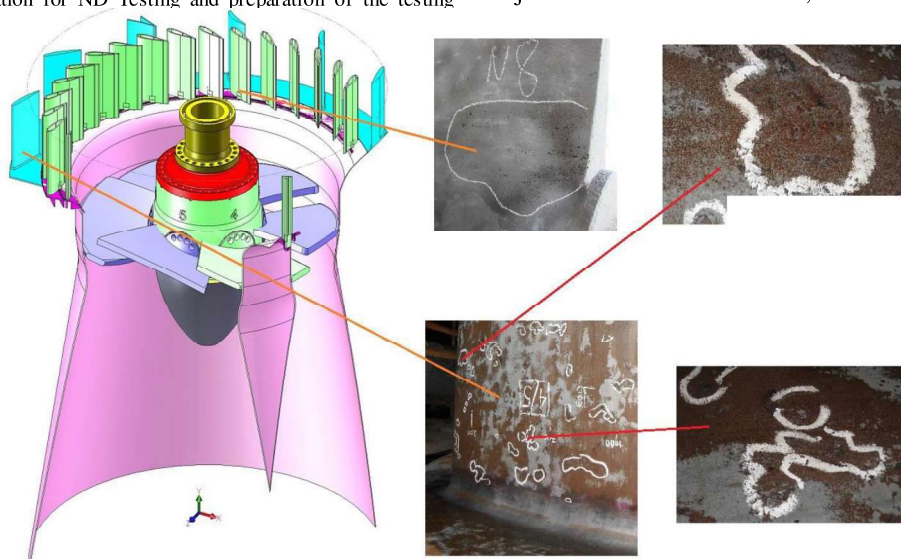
Cross-section of the impeller assembly of a vertical Kaplan hydro turbine with marked places of cavitation damage
